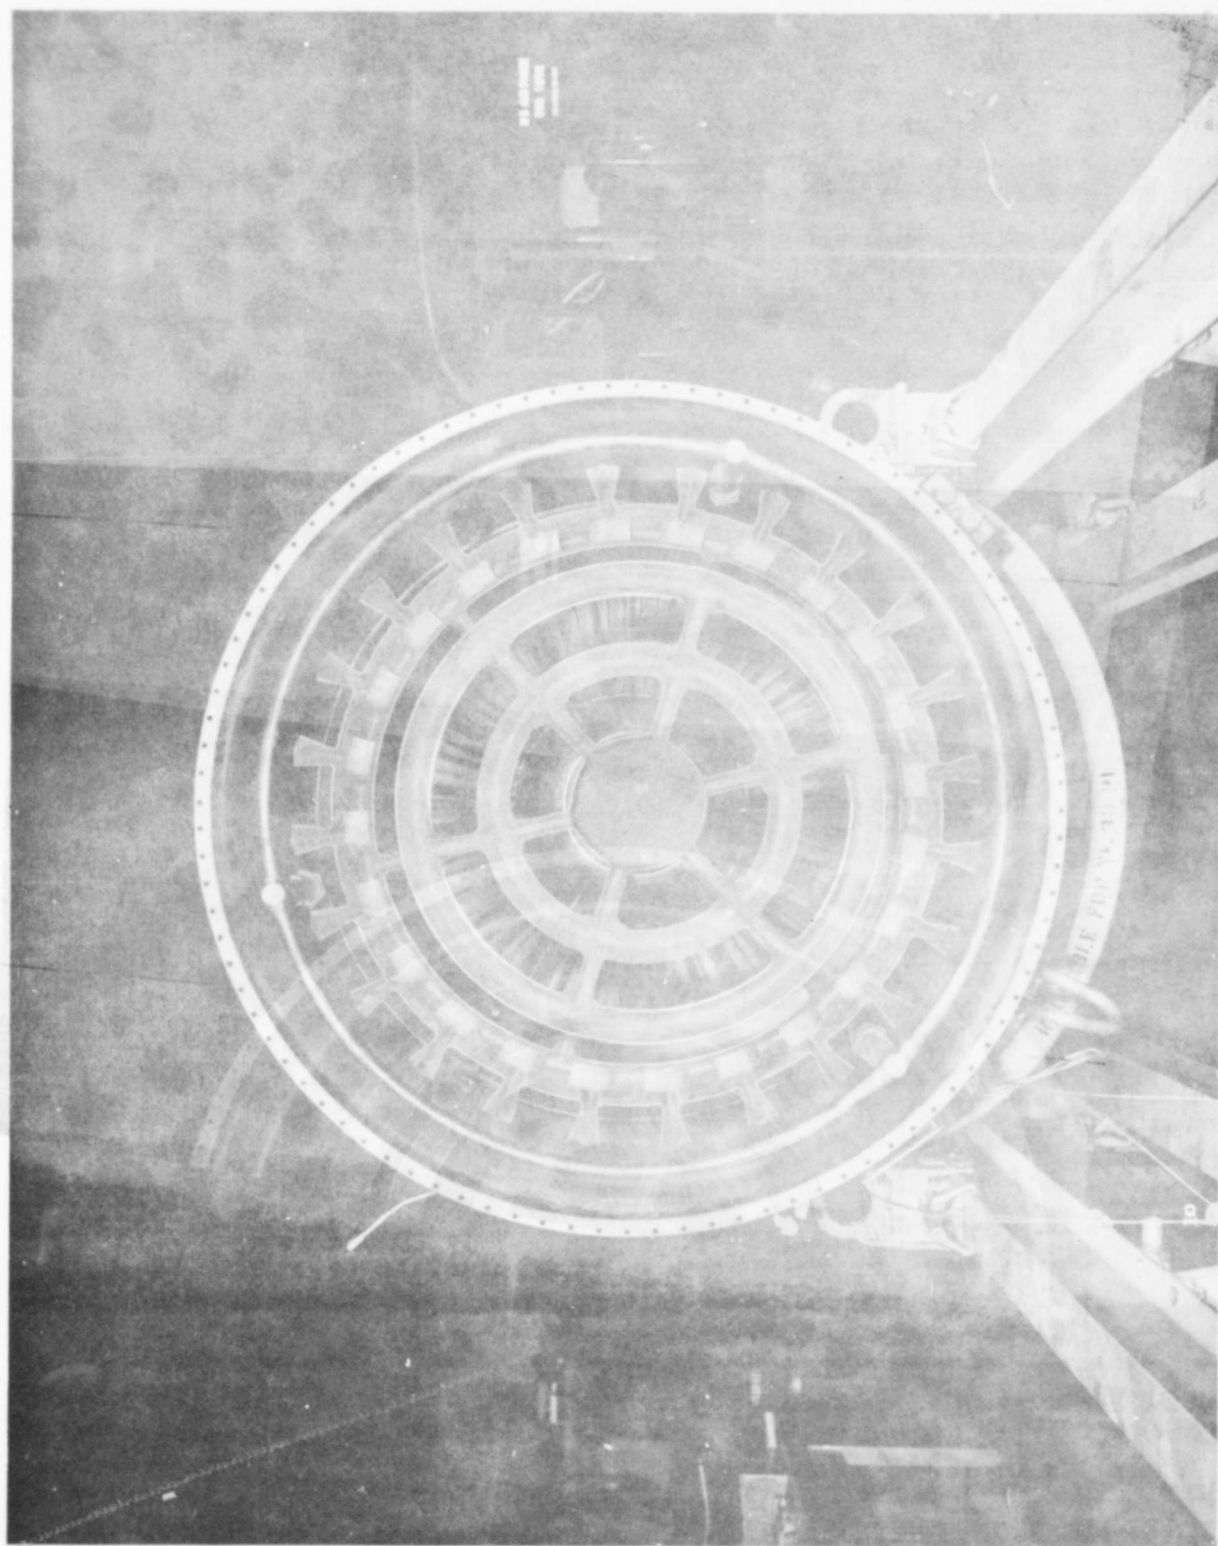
MODIFIED FLAMEHOLDER ASSEMBLY INSTALLED (REAR VIEW)
